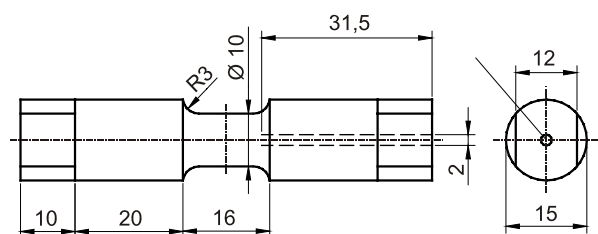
The shape and dimensions (in millimetres) of the torsion specimen
